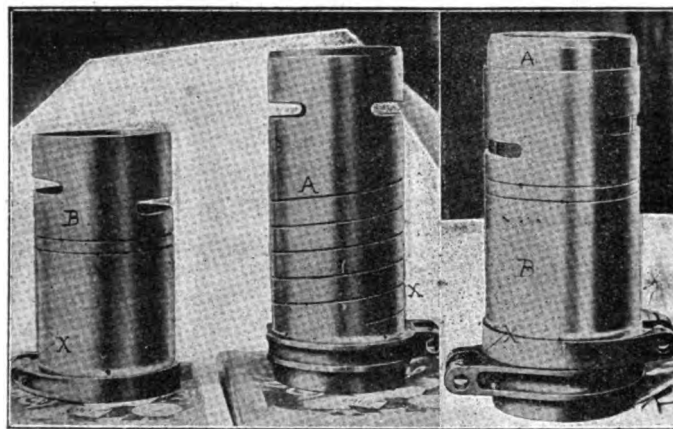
The Sliding Sleeves shown detached and mounted one over the other as they are fixed in the cylinder.
